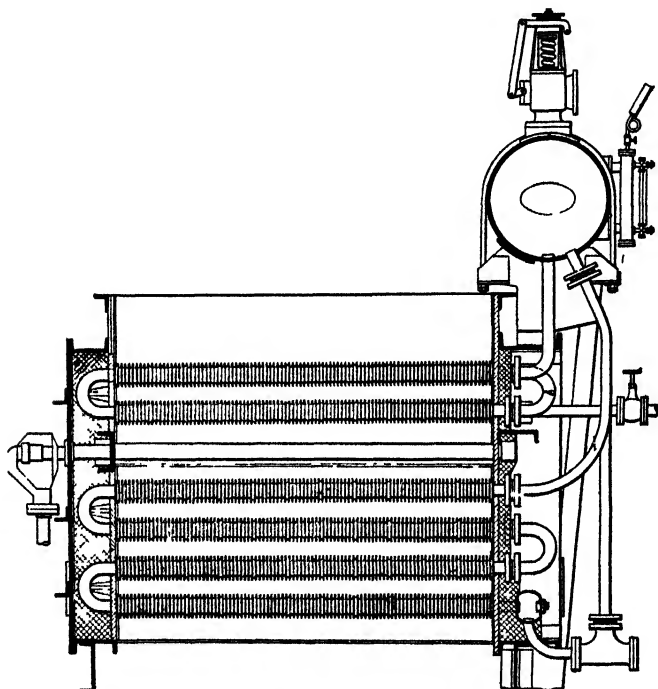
Foster Wheeler water-tube exhaust heater.
